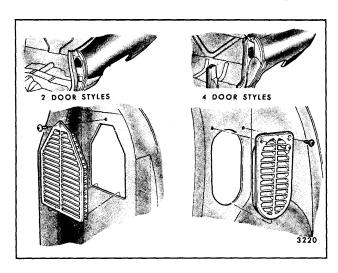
Pressure Relief Valve - "A" Styles Shown
